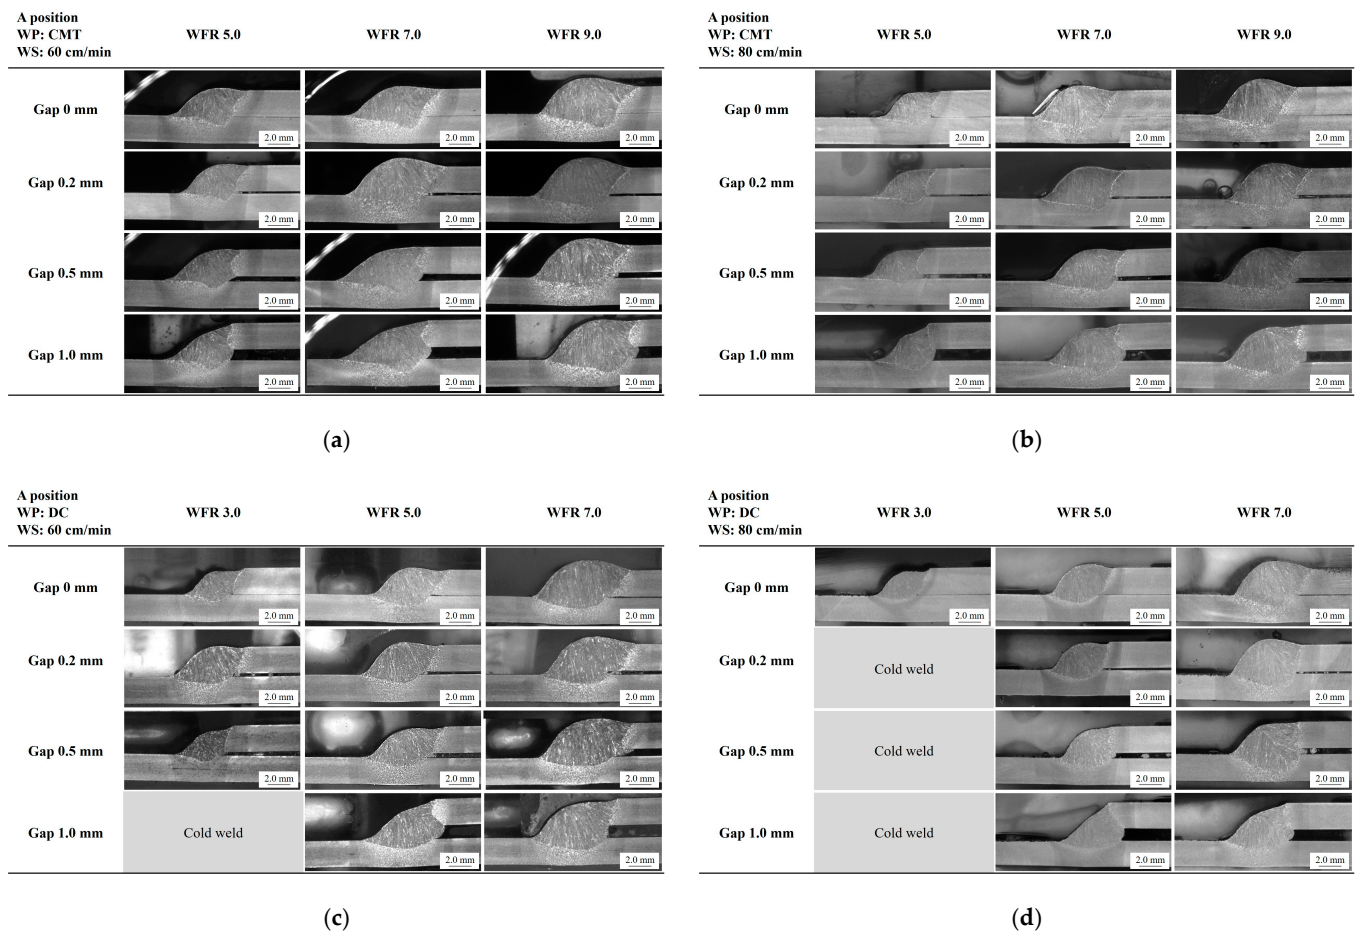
Cross-sectional images of the weld according to the welding parameters at position A: (a) WP: CMT, WS: 60 cm/min; (b) WP: CMT, WS: 80 cm/min; (c) WP: DC, WS: 60 cm/min; and (d) WP: DC, WS: 80 cm/min.
